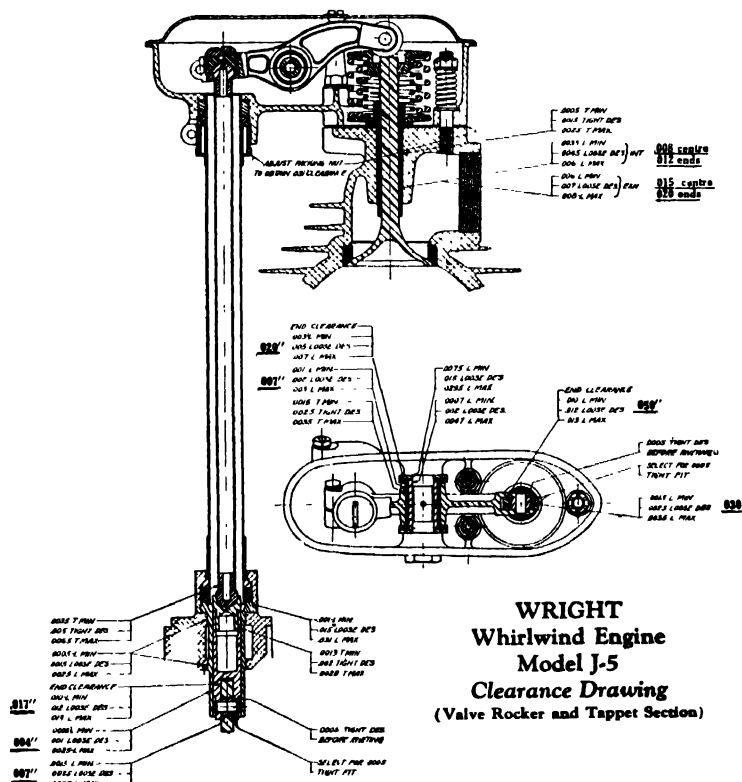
Valve Rocker and Tappet Section of Wright Model J5 "Whirlwind" Engine Showing Clearances.
